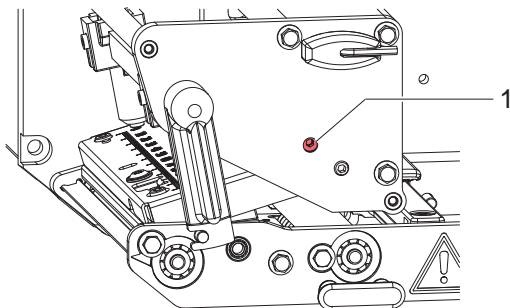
Adjusting the distance of the printhead to the paper guiding edge
